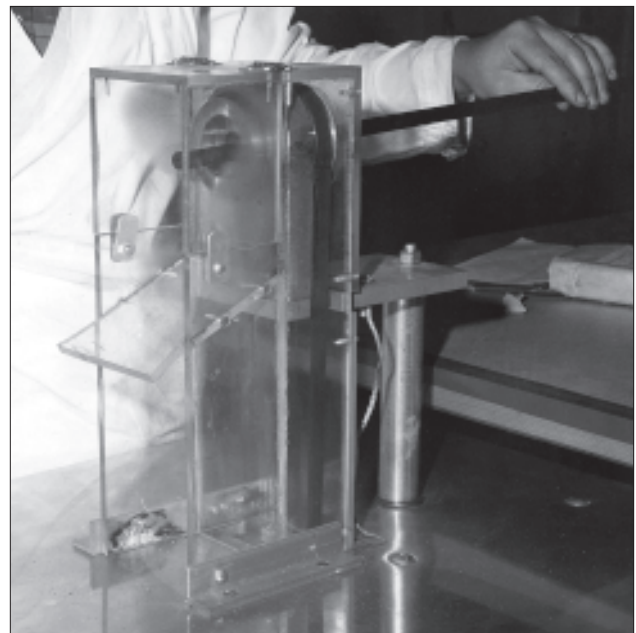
Propellant grain doweling fixture. MBA photo.
